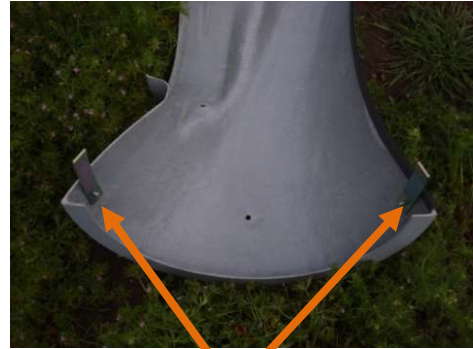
Rear Cover Top and Bottom Straps and Seal
